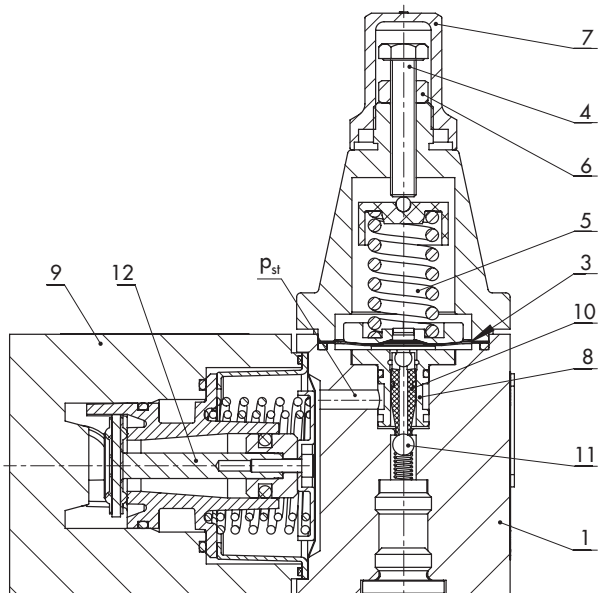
Type 3709-04/-05/-06/-07/-08 Pneumatic Lock-up Valve, control head and booster
